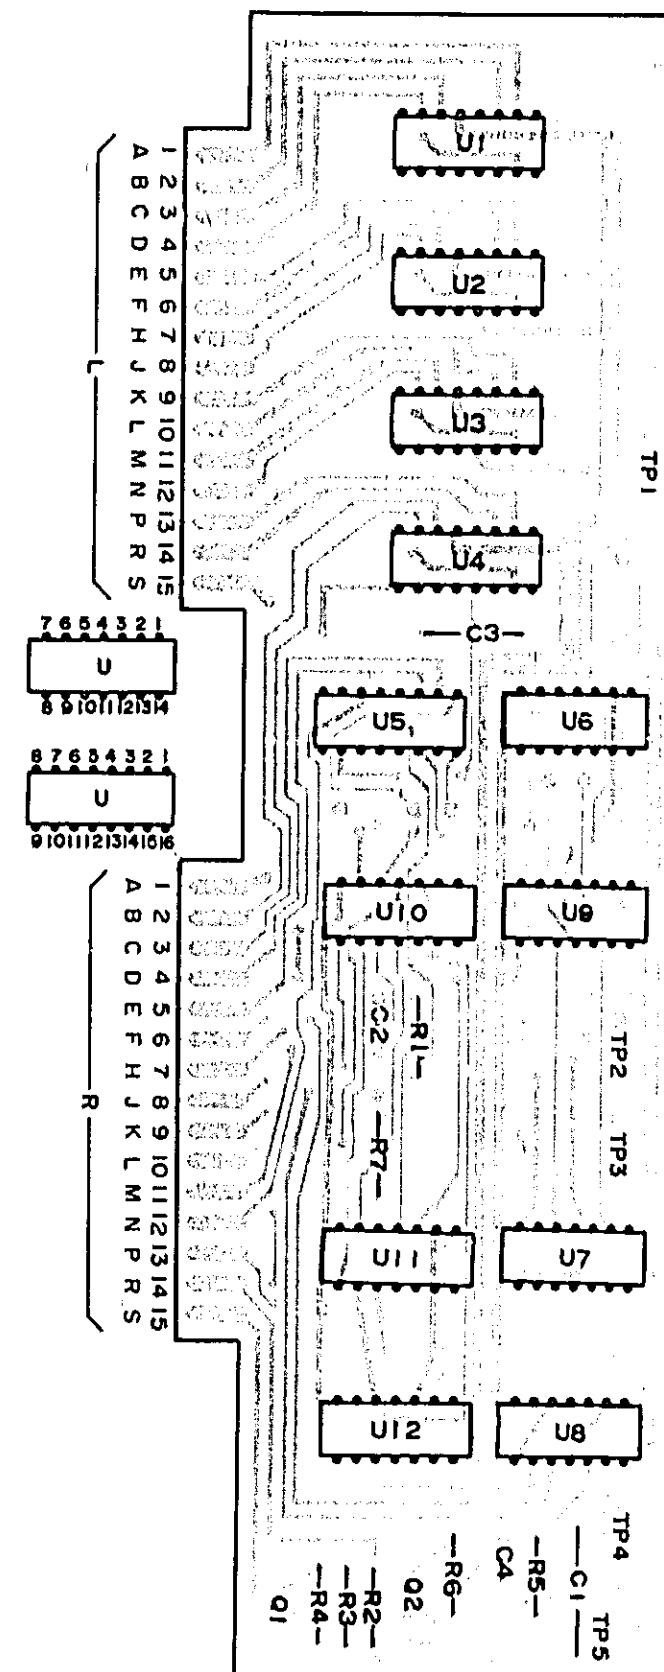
A23 C/L BCD Output Board Assembly Component Locations.
